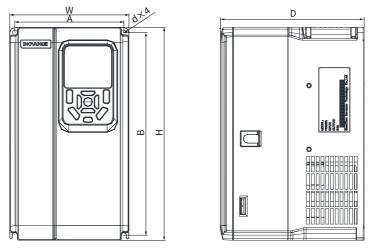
Outline dimensions and mounting dimensions of T1 to T4 models
